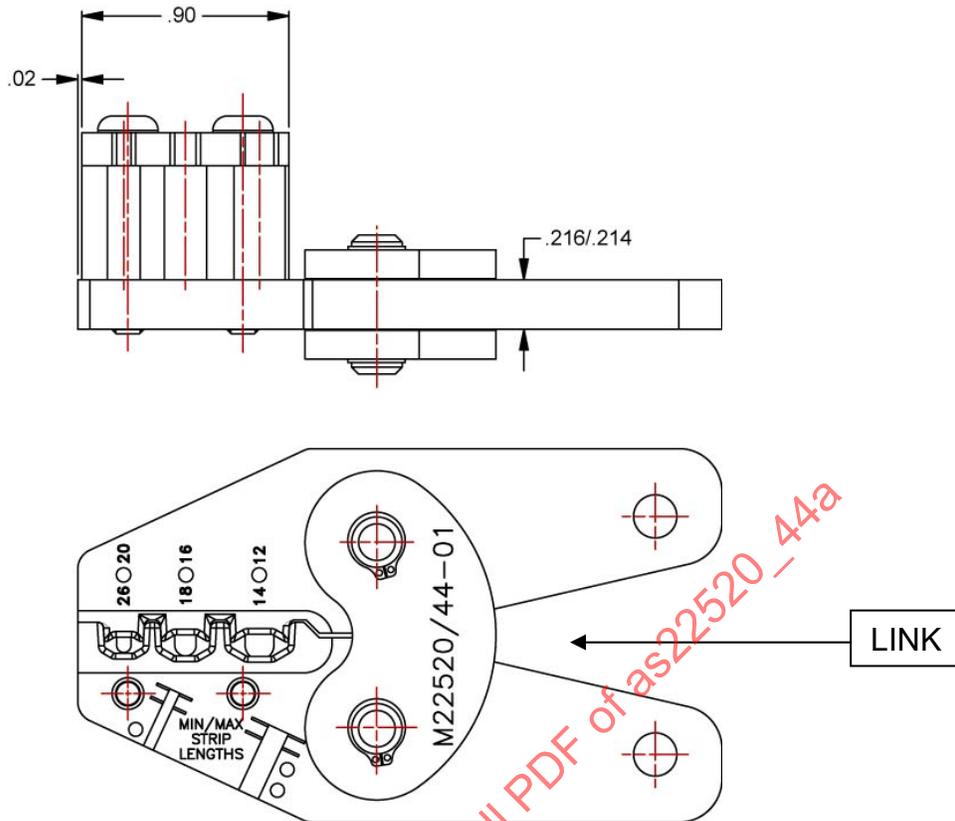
M22520/44-01 LOCATOR POSITION
